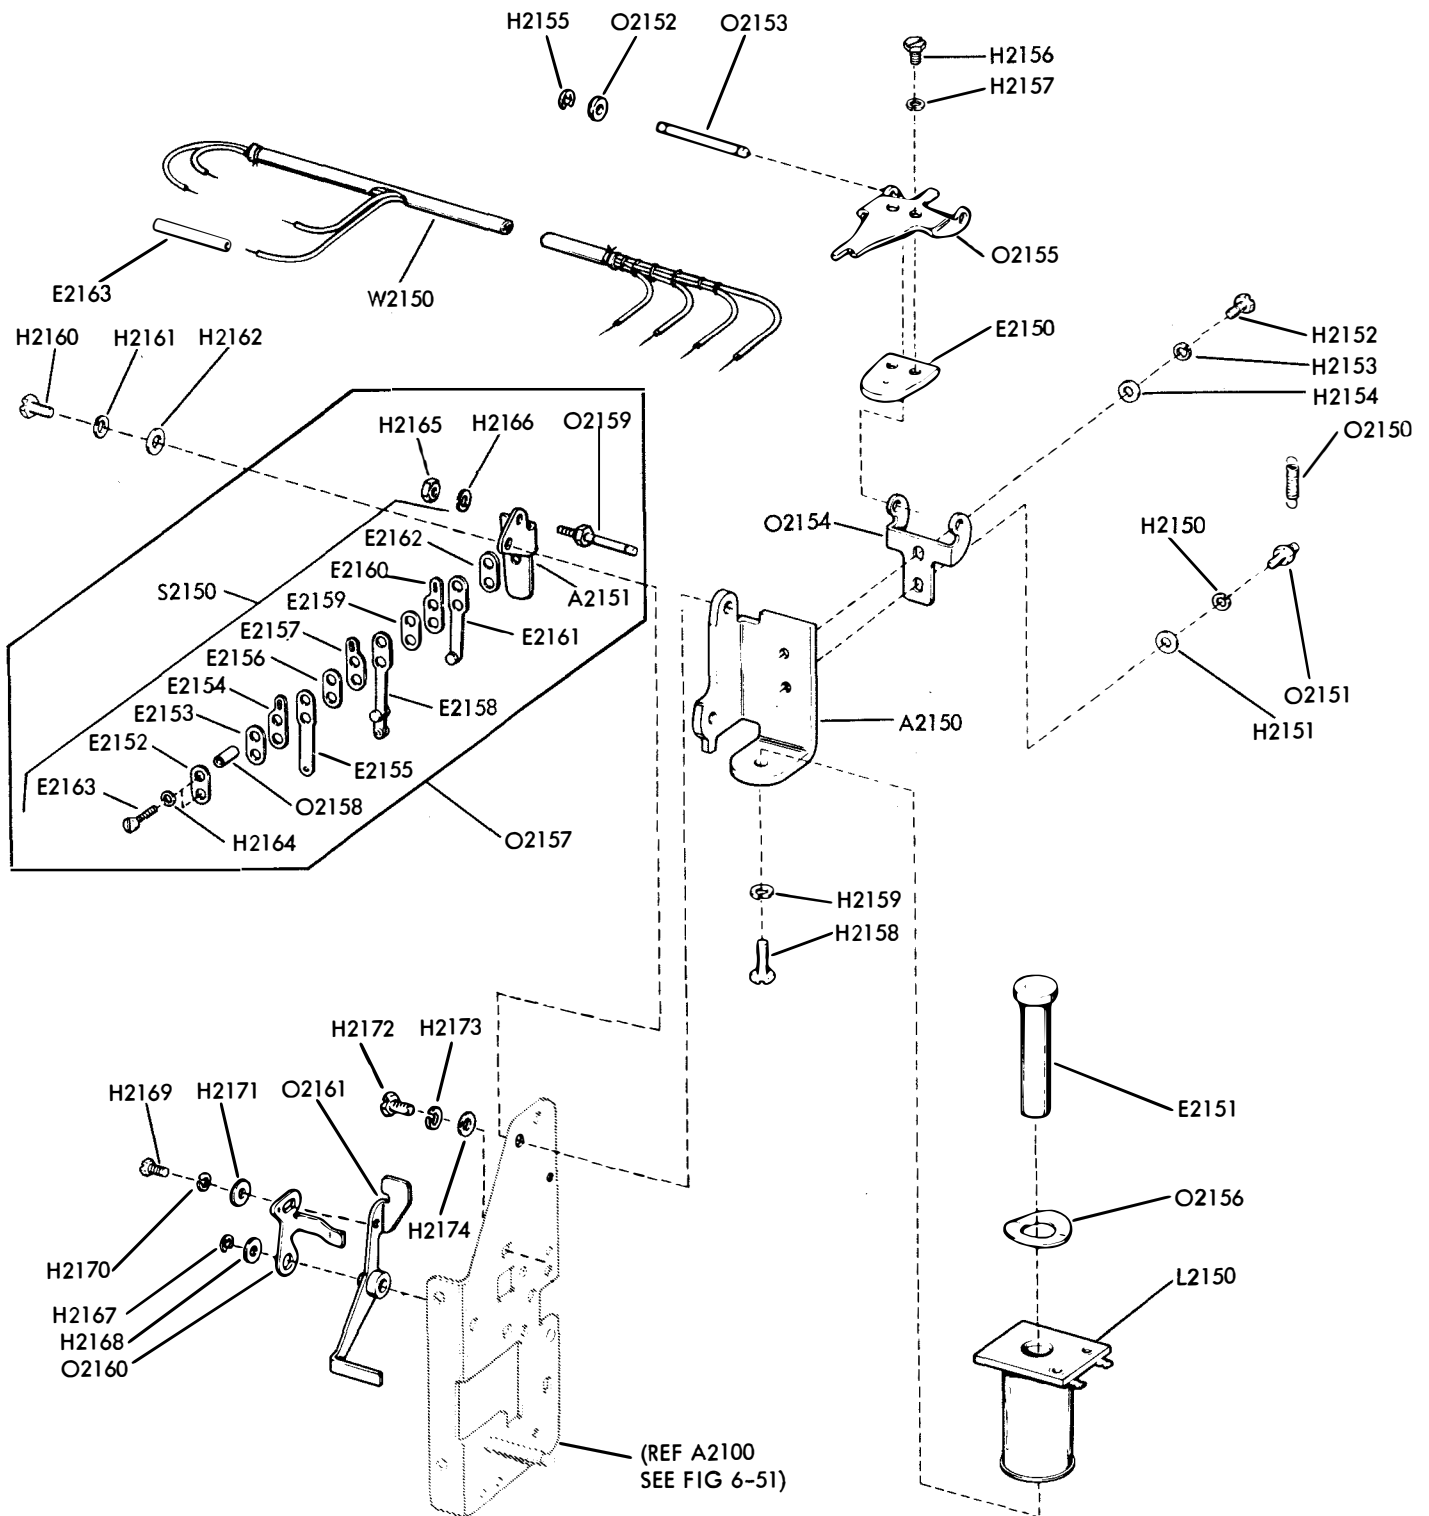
Typing Reperforator, Non-Interfering Blank Tape Feed-Out Mechanism
